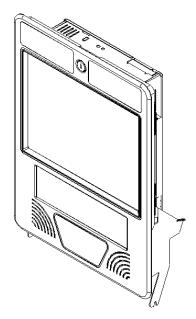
FMV Door Panel Assembly (Isometric View).
